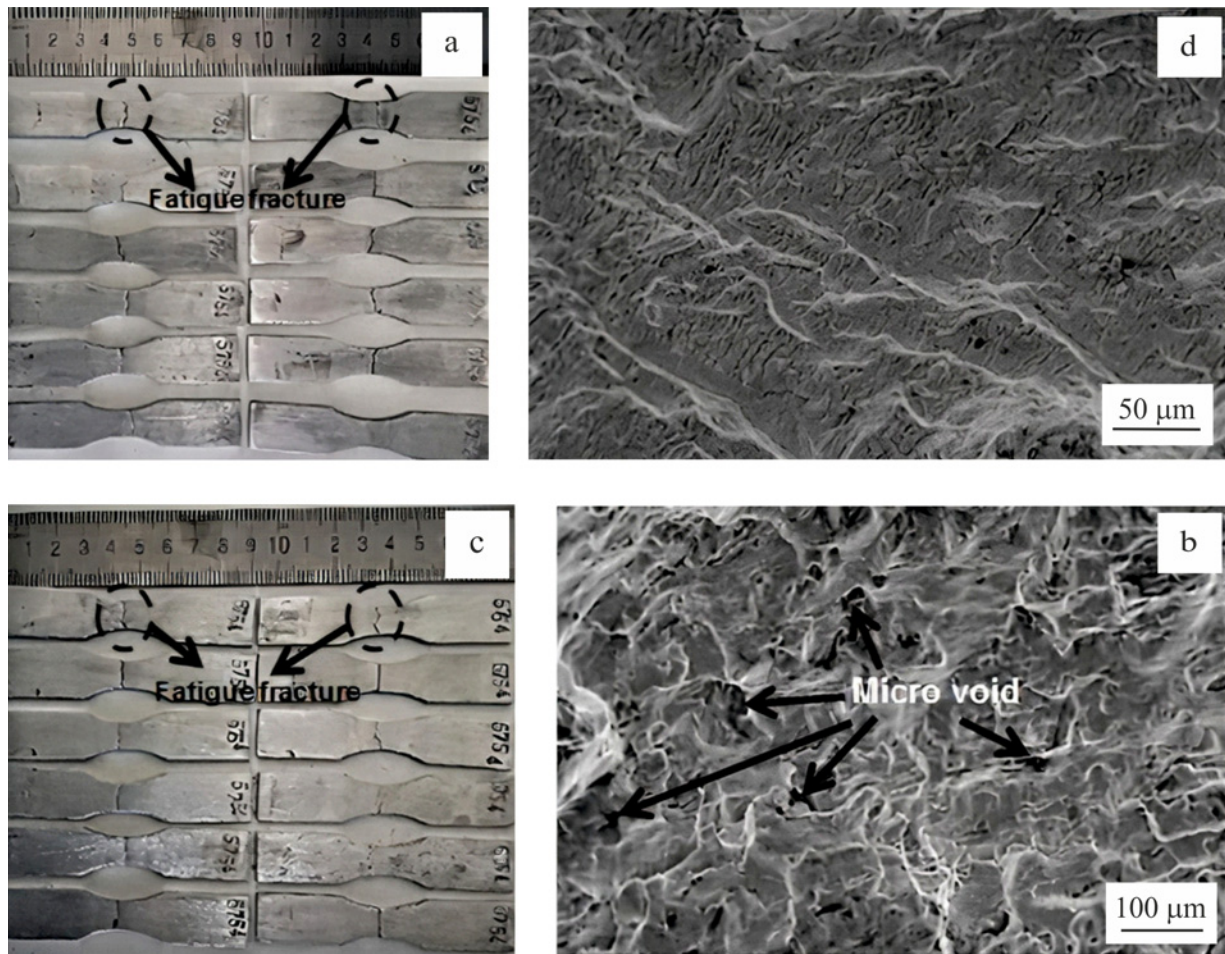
Weld fracture behaviour and SEM image surfaces of fatigue test samples: (a) and (b) FSWed samples, (c) and (d) samples of GMAW.
